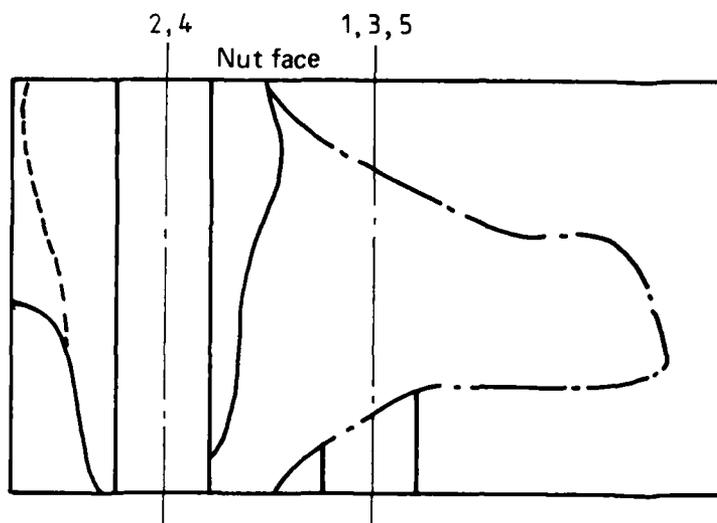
(b) FRACTURE SURFACES: SPECIMENS TYPE (C)
